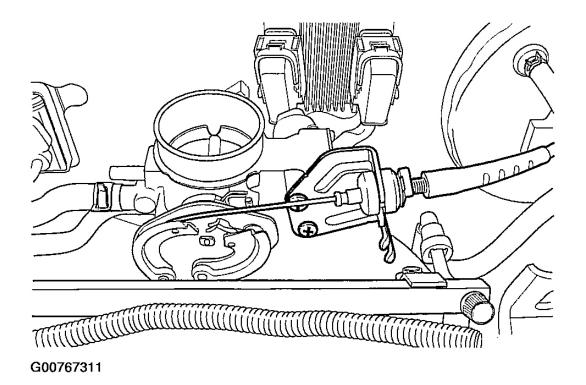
Installing The Throttle Cable Bracket Courtesy of SUZUKI OF AMERICA CORP.
